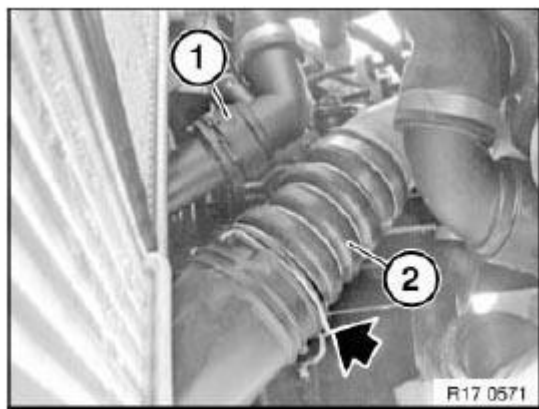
Identifying Coolant Hose And Charge-Air Duct
